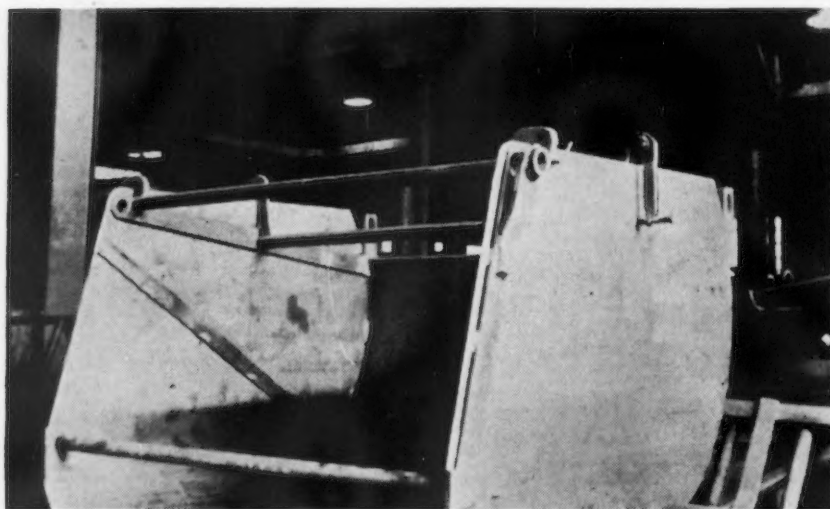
Bowl for 10 cu. yd. air-powered scoop spotted ready for continuous seam welding. The bowl is of $\frac{1}{4}$ -in. high tensile steel and 1-in. reinforcing bands welded into one integral unit.
